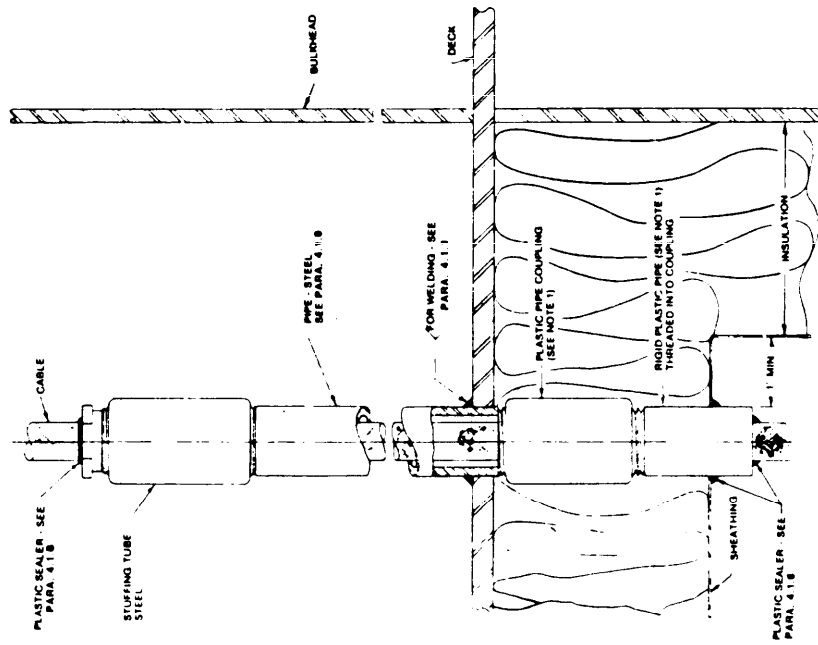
C15. Stuffing tubes through refrigerated spaces.
